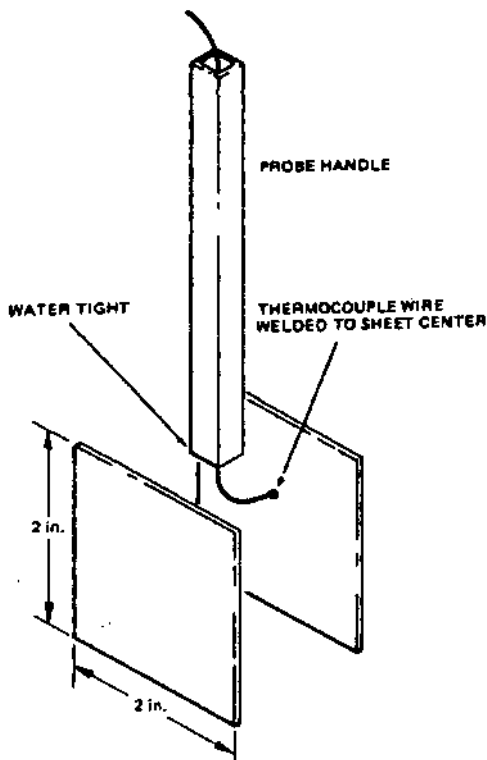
Aluminum sheet probe. Sheet edges must be TIG welded water tight before use.
